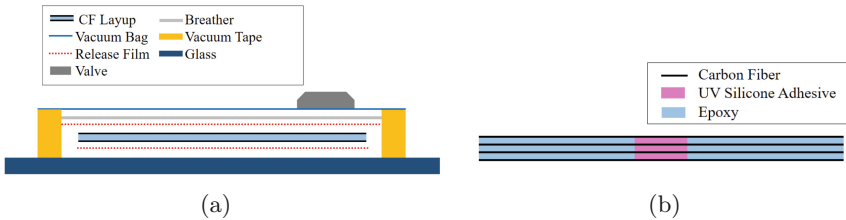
(a) Schematic of a standard vacuum bagging curing process for a flat sheet of carbon fiber. Subsequent figures labelled as “Layup” indicate the layer arrangement to be vacuum bagged. (b) Layup of a single fold embedded into a four-ply rigid sheet of carbon fiber. Epoxy produces rigid sections, silicone produces flexible, elastic sections in the form of folds.
